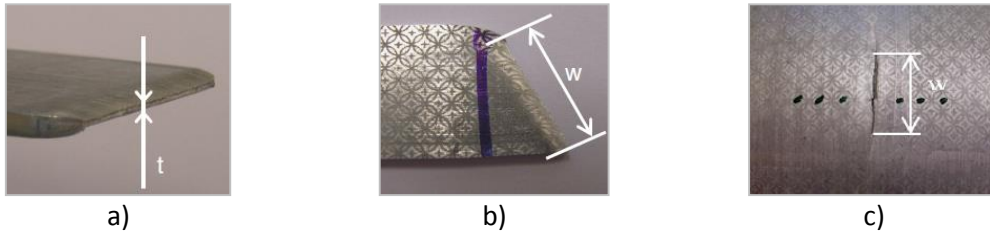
a) measuring the thickness after fracture; b) width after fracture; c) measuring width in case of Bulge [8]
